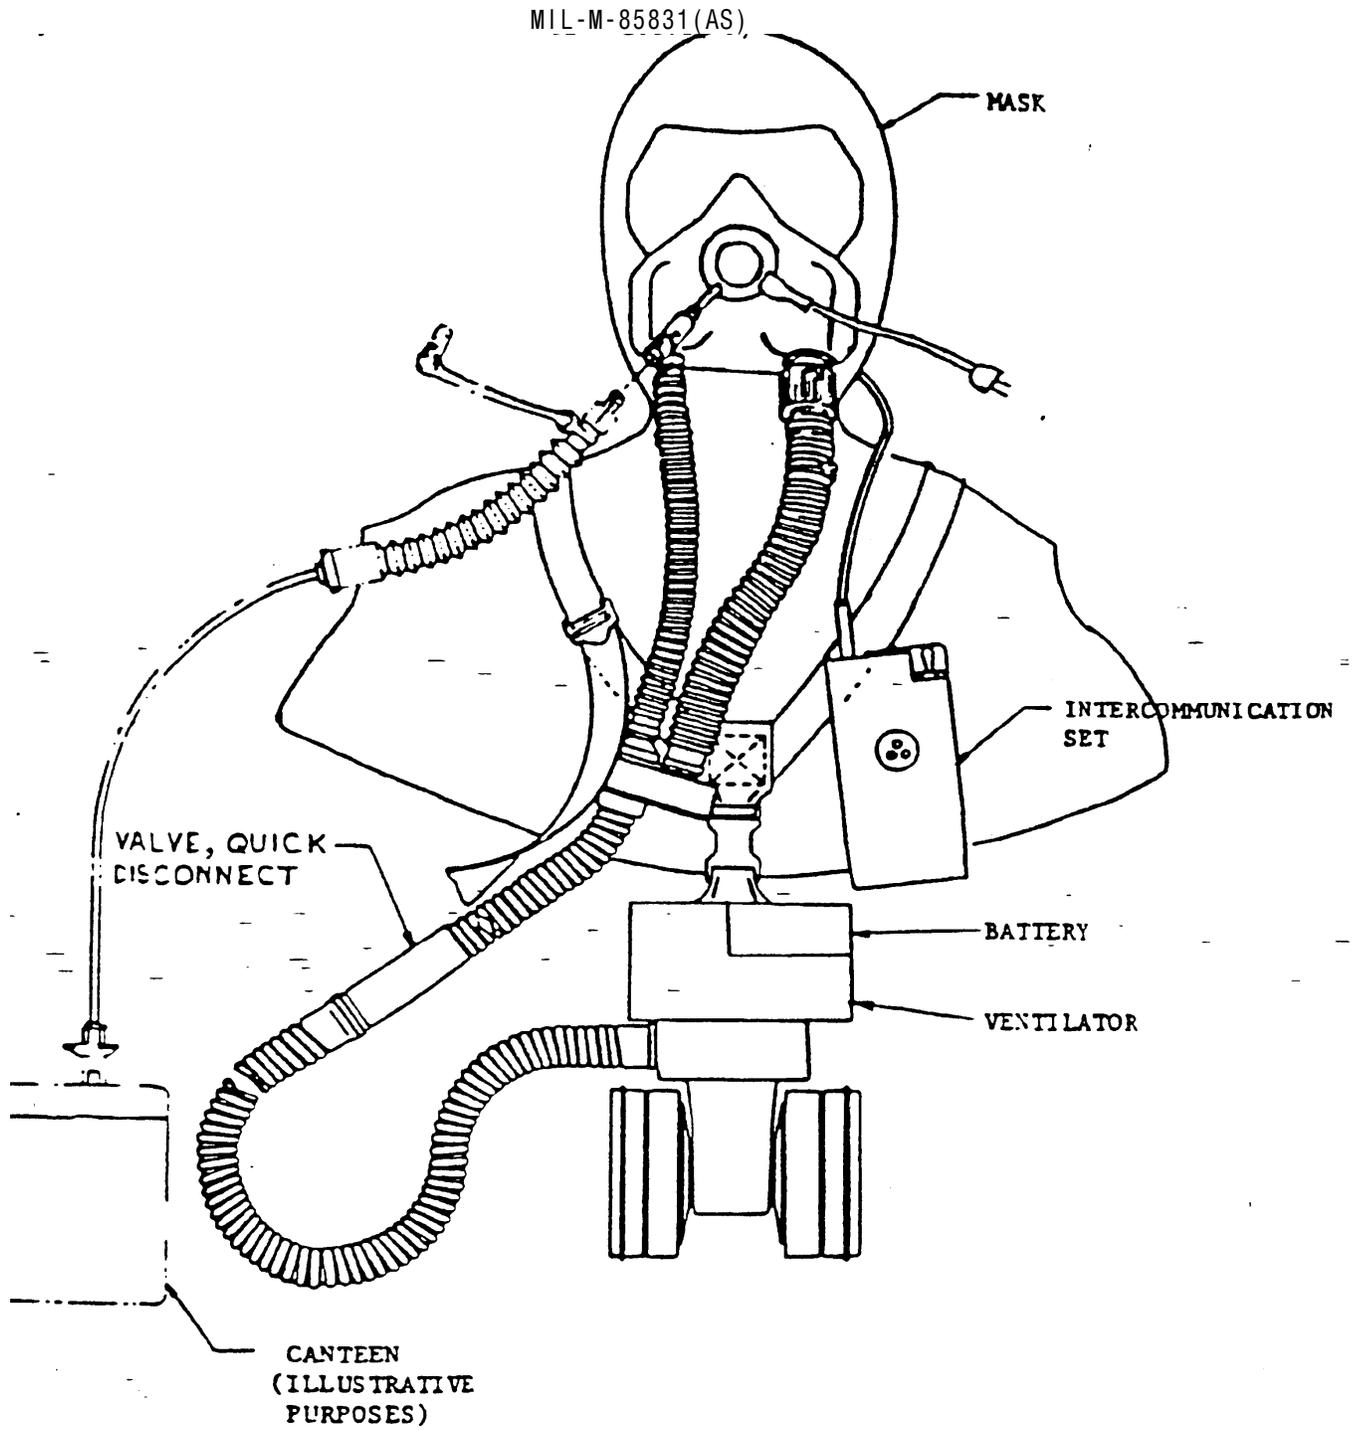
PROTECTIVE ASSEMBLY, CBR, HELICOPTER AIRCREWMEMBER
